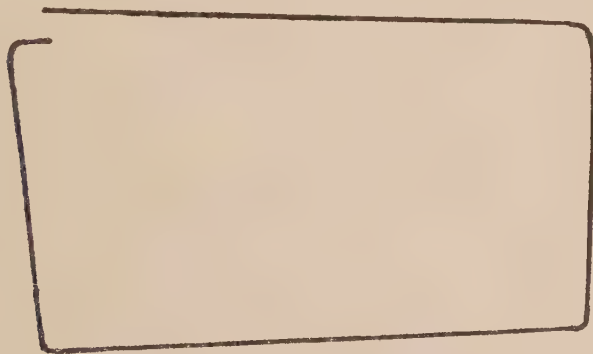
TOP VIEW OF CASTING TIN FOR MAKING LEAF MOULDS.
